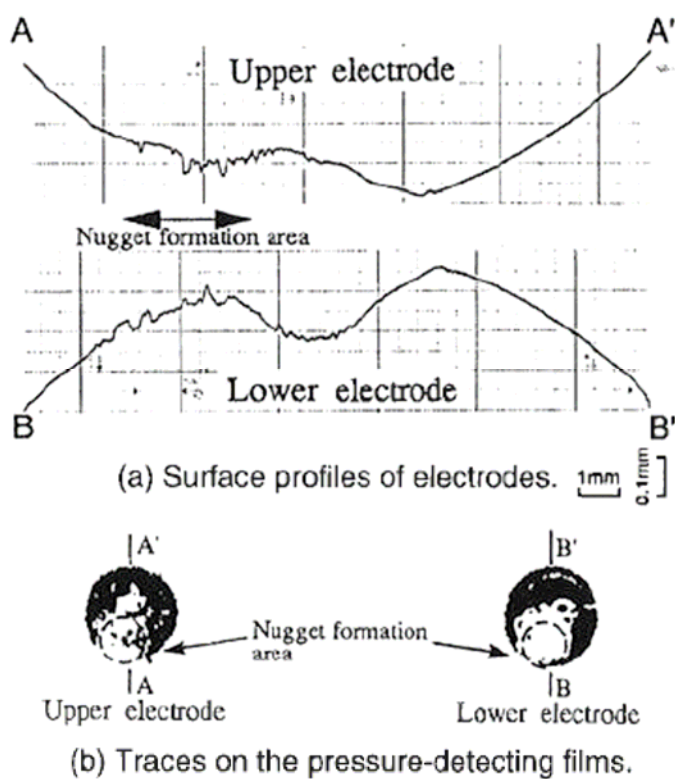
Surface profiles of worn electrodes and the traces on the pressure-detecting films in aluminum alloy sheets spot welding.
